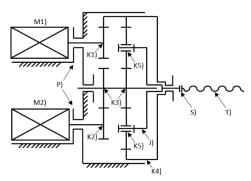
Kinematic diagram of the planetary gear module. Motor output wheels K1) and K2), Inner core and centre wheel K3), Outer centre wheel K4), Satellites (2) K5). Designations of other drawing elements: Carrier J), Motors M1) and M2), Gripper base P), Flexible coupling S), Lead Screw T).
